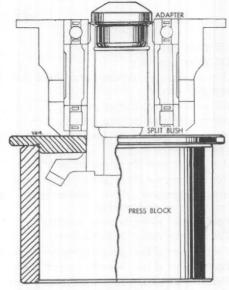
Press block group T.77683 and adapter T.77684 for pressing port generator drive gear clear of the housing.
